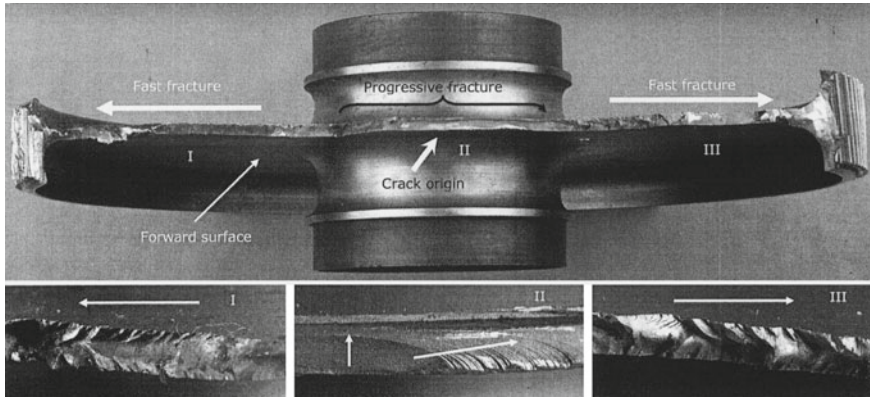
Fatigue fracture failure of a large gear due to improper engraving technique
